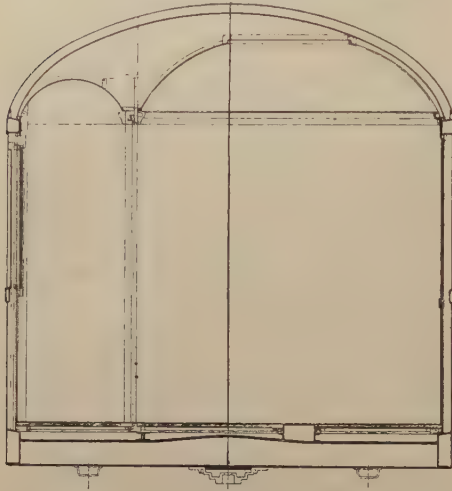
Cross section of body of welded express train corridor coach.
